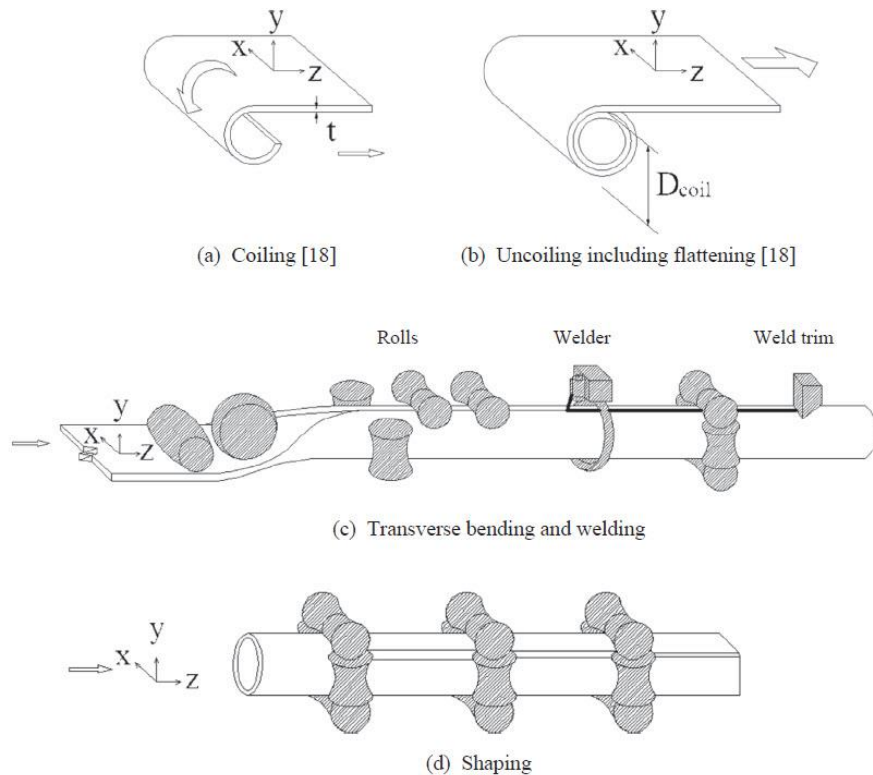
Continuous forming process – circle-to-rectangular forming [4]
